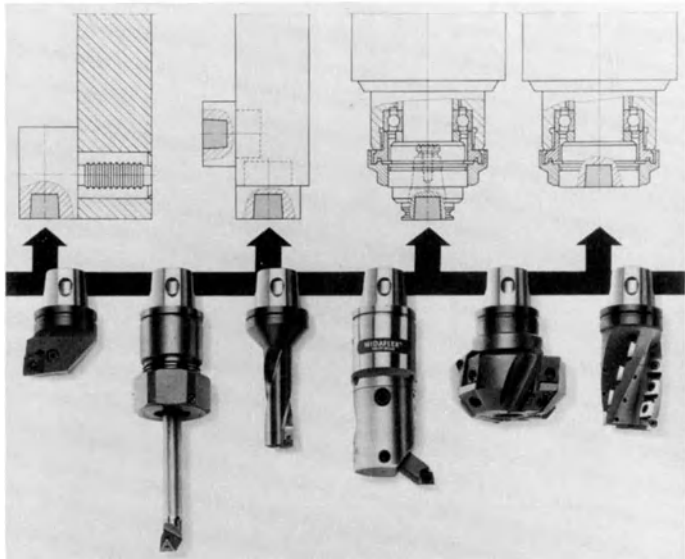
A universal cutting adaptor for modular quick-change tooling. [Courtesy of Kruppwidia.]
